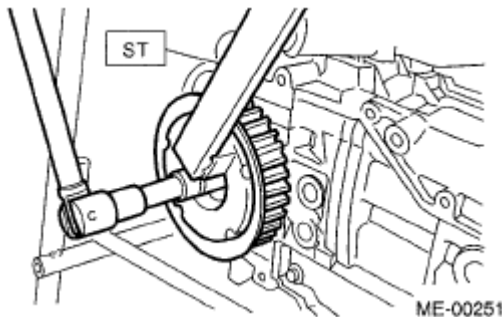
Removing Cam Sprocket No 1 Using Cam Sprocket Wrench ST499207400
